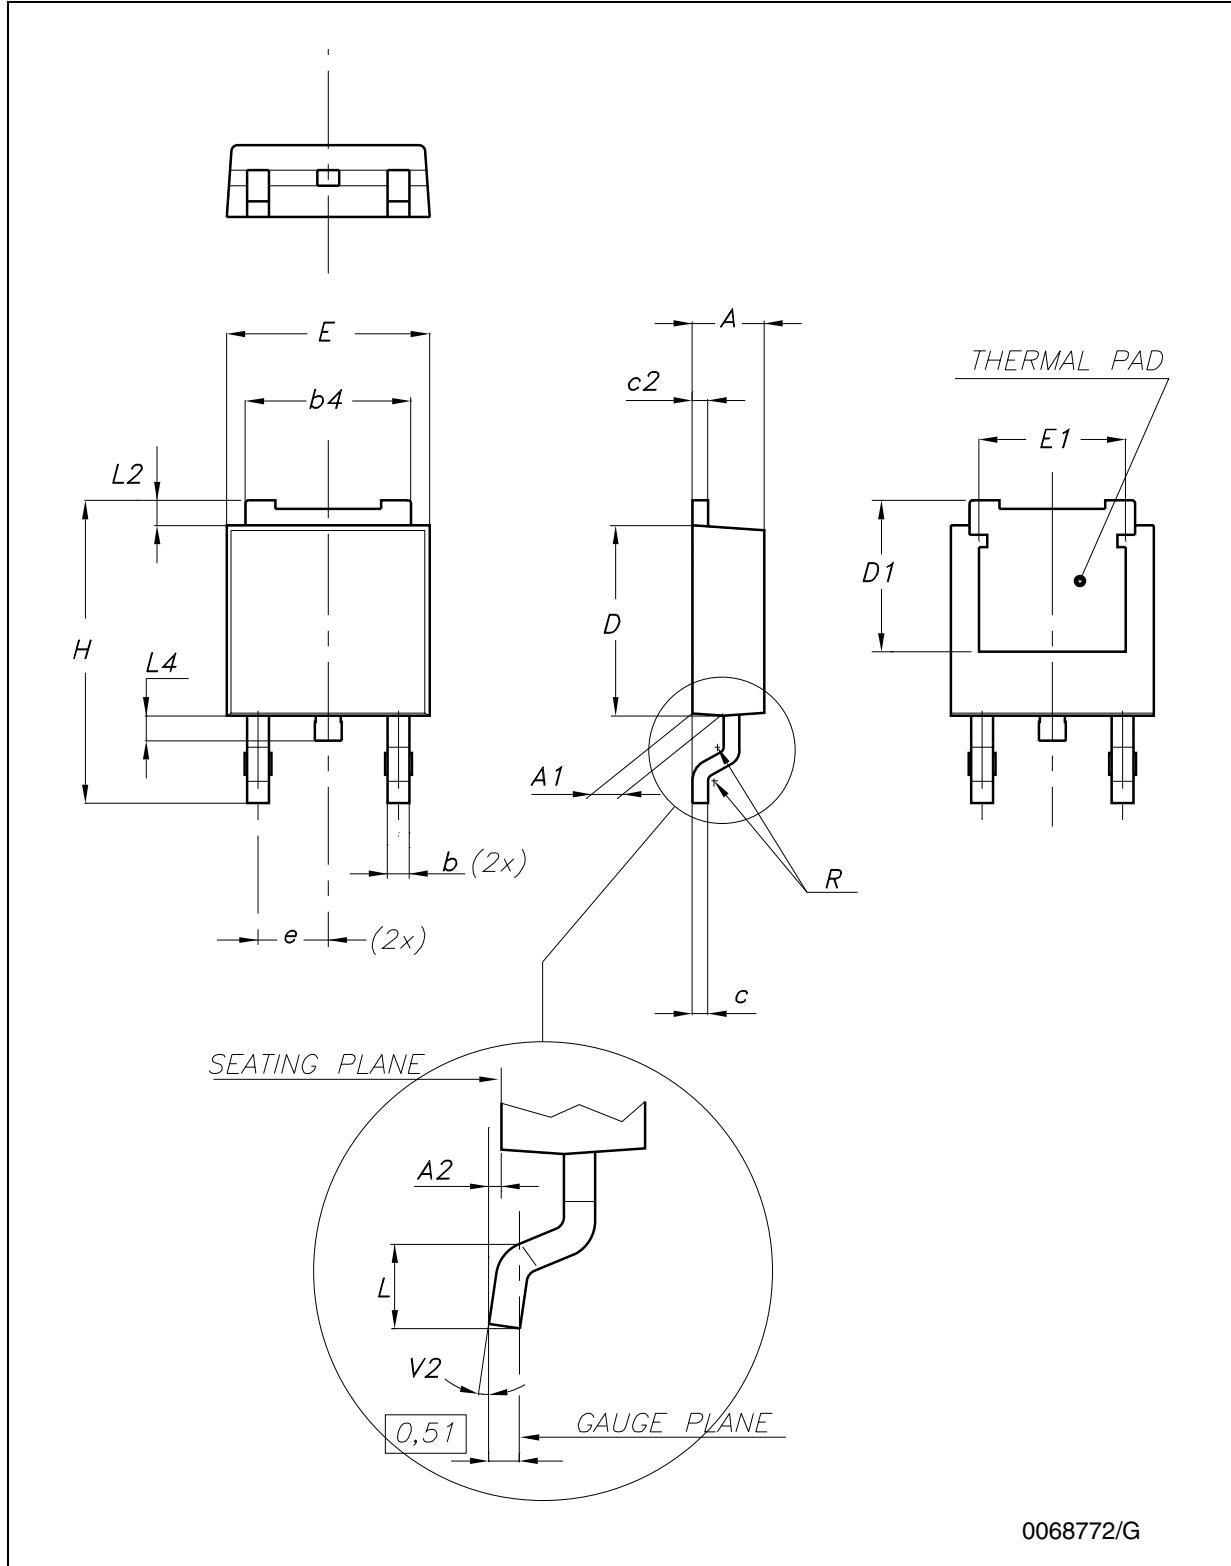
Drawing dimension DPAK (type FUJITSU-subcon.)
